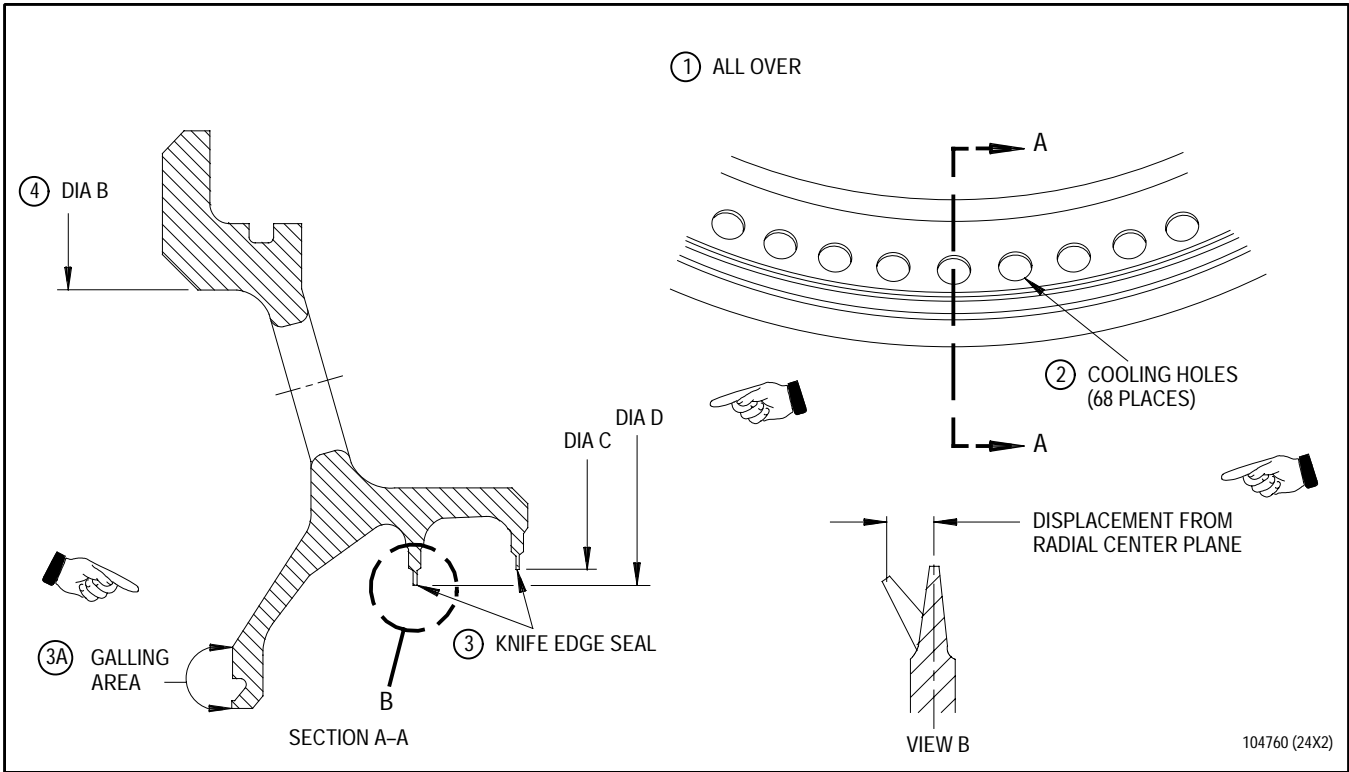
First Stage Turbine Blade Front Retaining Plate - Inspection
